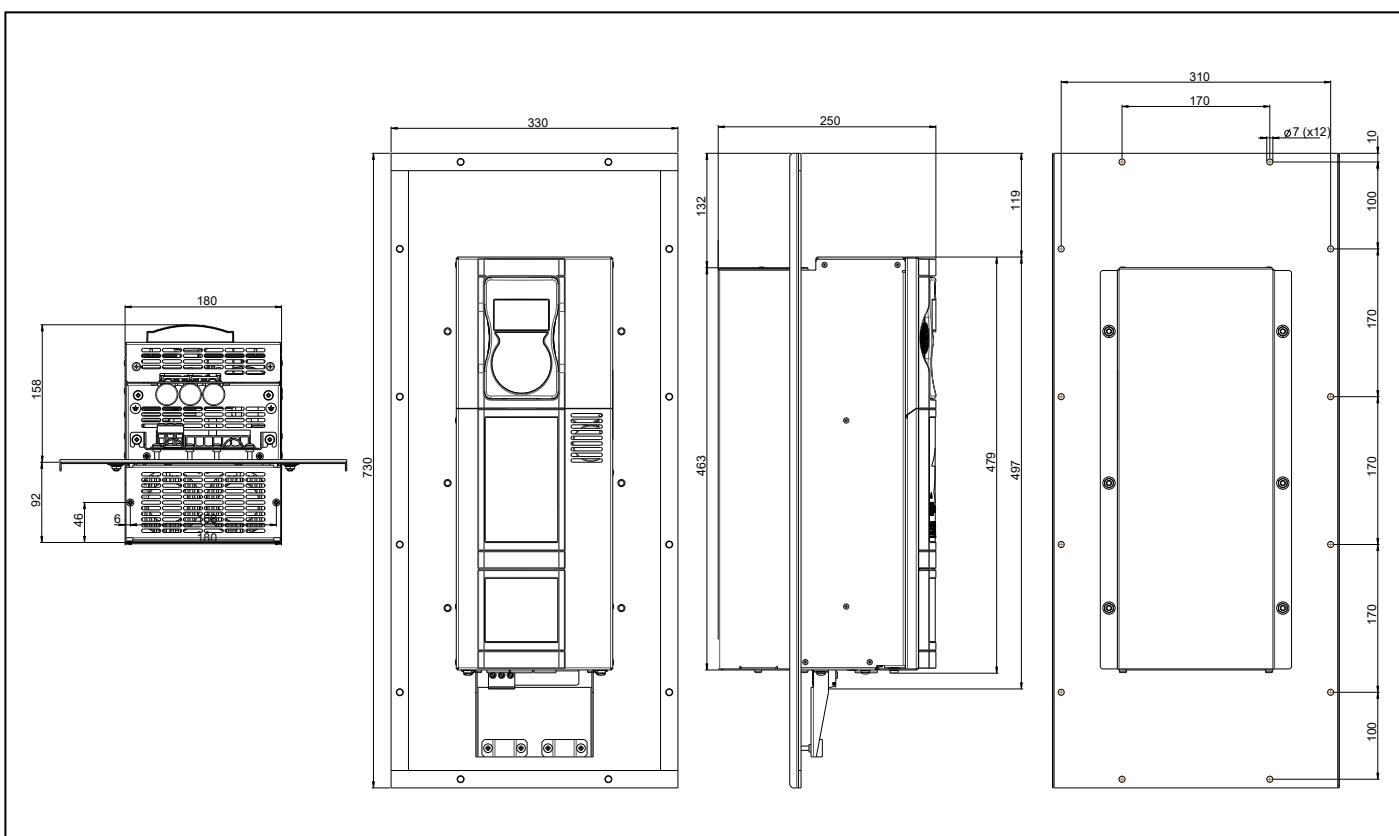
Size 3 ADV200 SP-EH... dimensions
